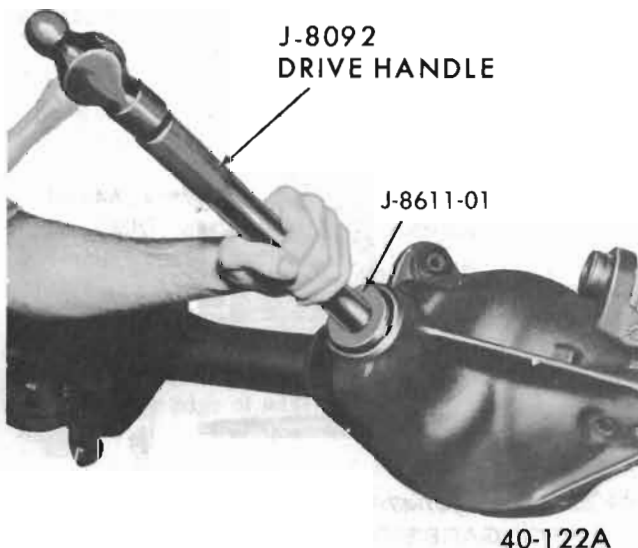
Installing Front Pinion Bearing Outer Race
